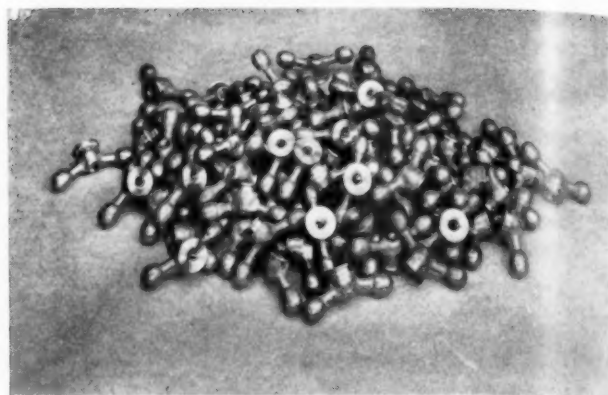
Fig. III. Castings in Fig. II after they have been cleaned in a degreaser.
